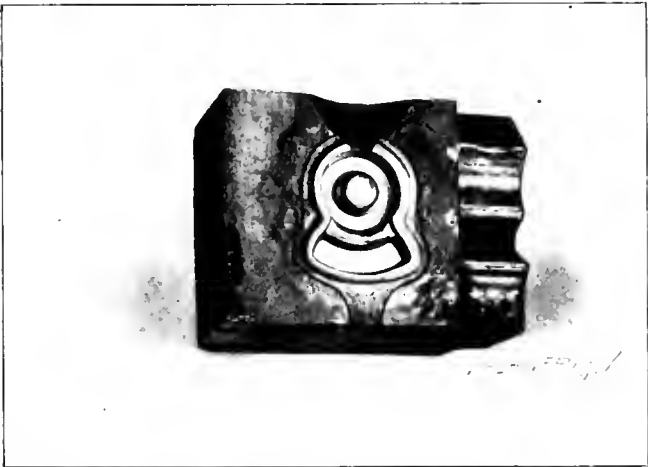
An Example of Drop Forging Die showing Breaking-down Die at the Right.
